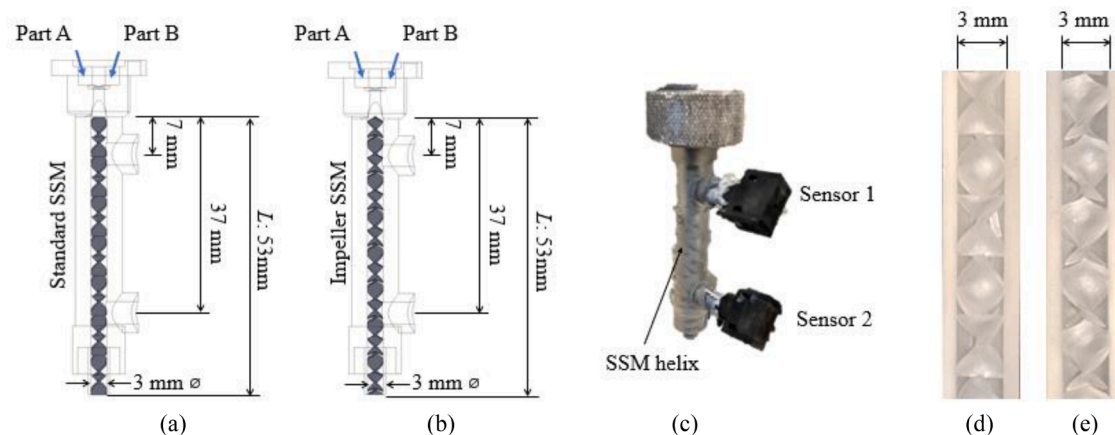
(a) The standard SSM and (b) 22.5-22.5-22.5 Impeller SSM with the location of the pressure ports and overall length annotated, (c) the standard SSM produced using SLA and with pressure sensors installed, and cutaway view of the (d) standard SSM and (e) 22.5-22.5-22.5 Impeller SSM produced using SLA.
